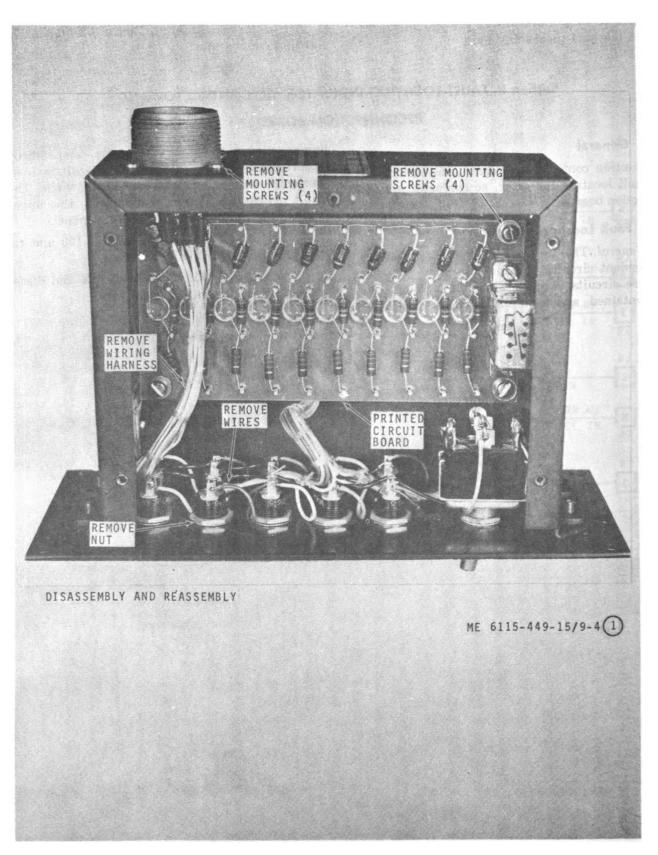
Fault locating indicator (Sheet 1 of 2).
